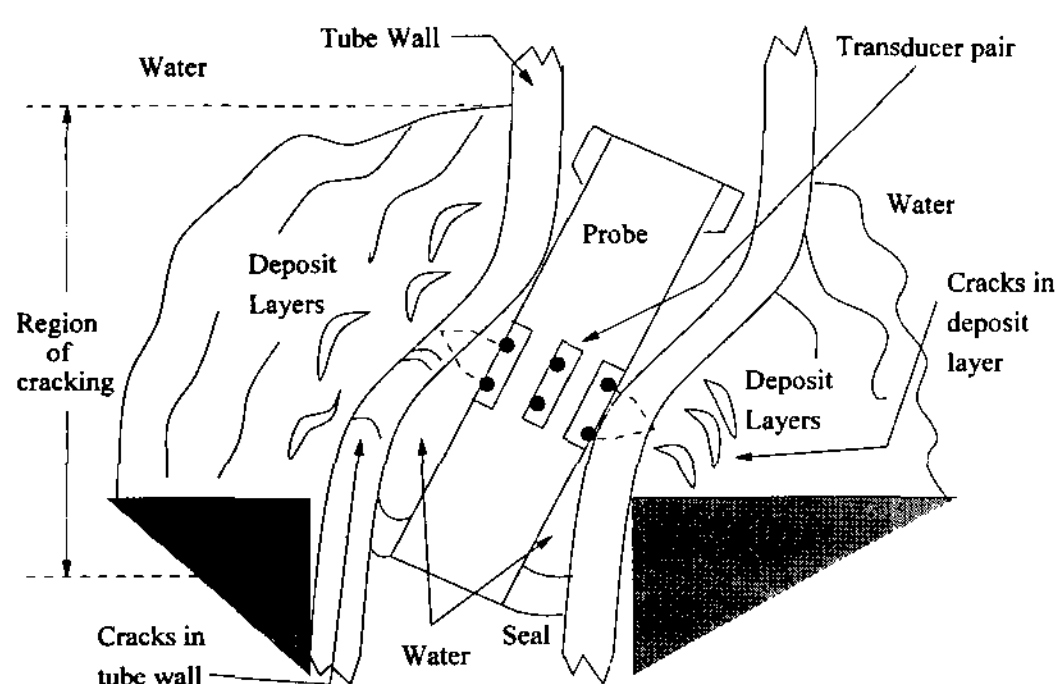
Geometry of ultrasonic NDE of the steam generator tube
